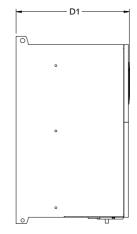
Outline and mounting dimensions of 380V 132–200kW VFD models
